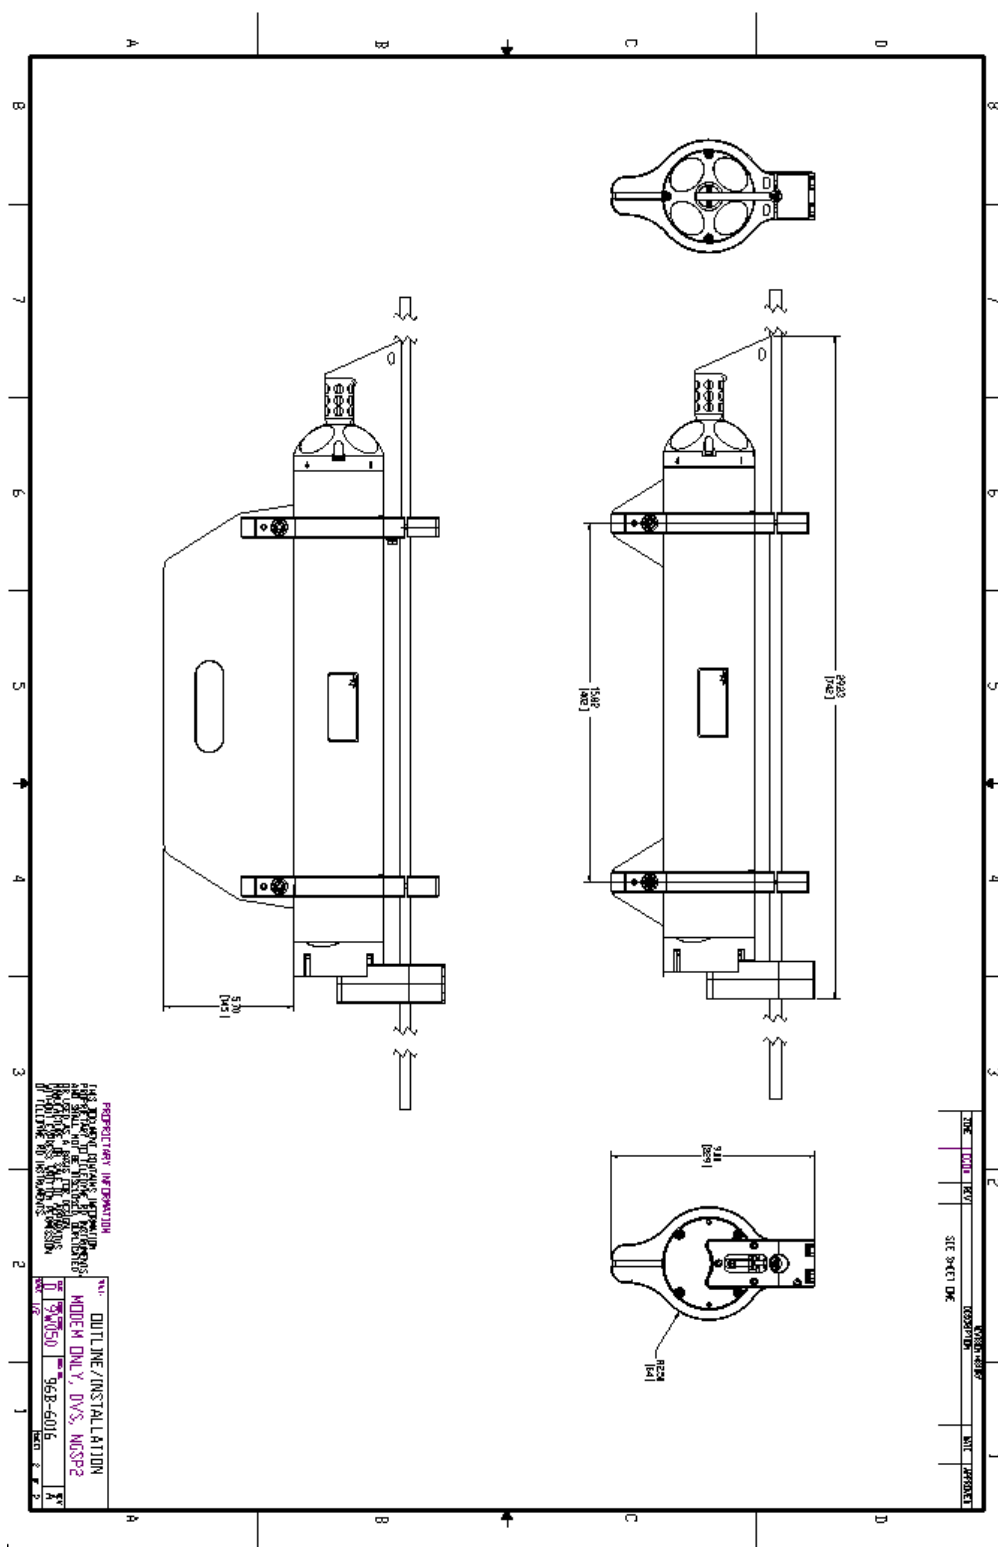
Outline Installation Drawing 96B-6016 Sheet 2
